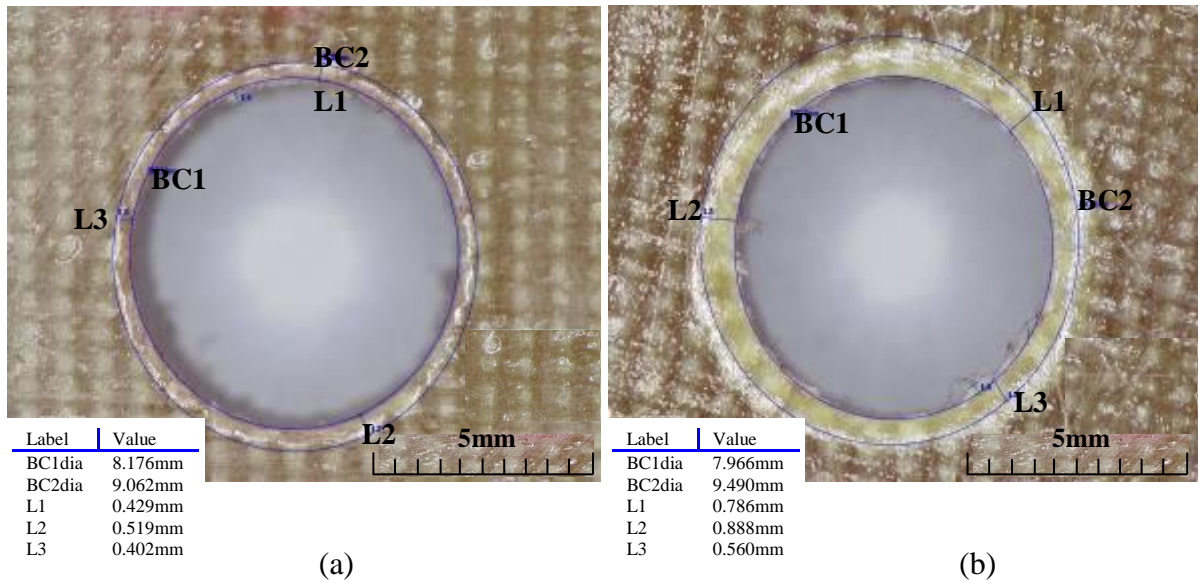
Optical microscope pictures for hole no.16, of drilling process (a) upper hole surface (b) lower hole surface
